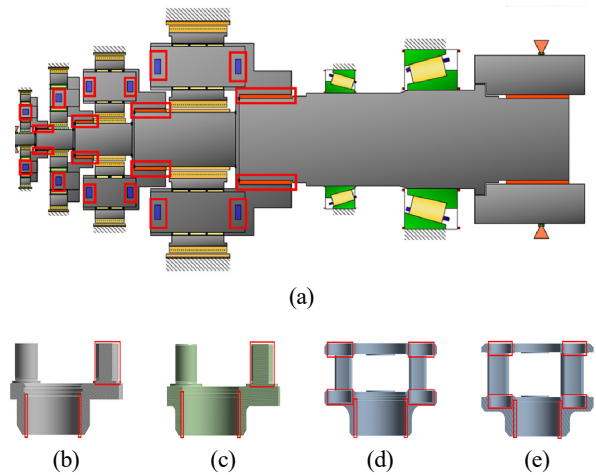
Carrier and gear-train connection parts: (a) gear train, (b) 1st carrier, (c) 2nd carrier, (d) 3rd carrier, and (e) 4th carrier
